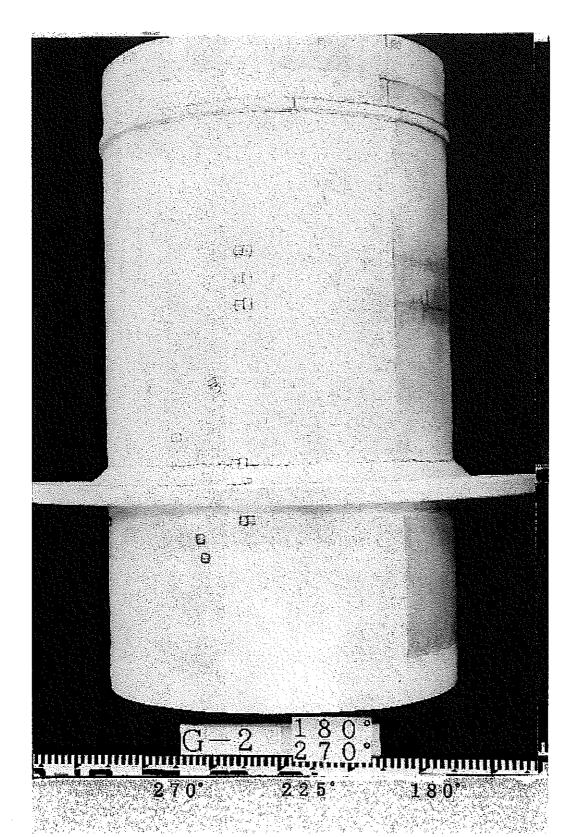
Photograph of initiated cracks on the surface of the inner vessel after 1055 cycles (316FR 180° - 270° ref: Fig.A4.1)
